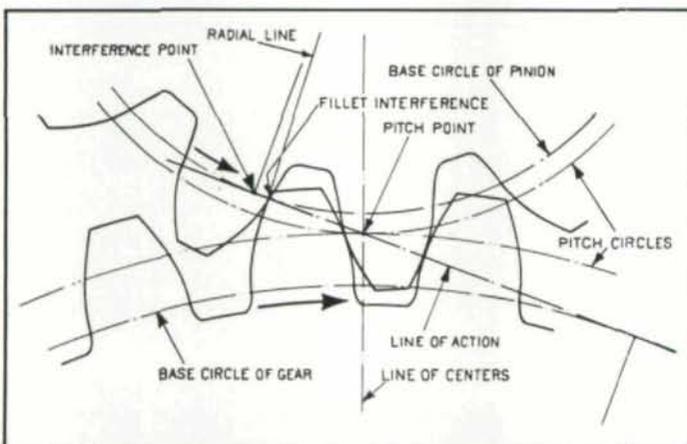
Diagram Illustrating Term Known as Fillet Interference. Gear Tooth Contacts Non-Involute Portion of Pinion Tooth Inside the Zone of Contact.
